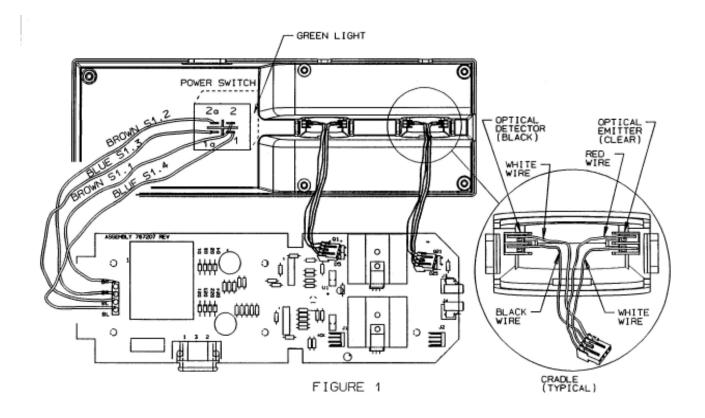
767 Wiring PC Board - 767207 Rev. B
